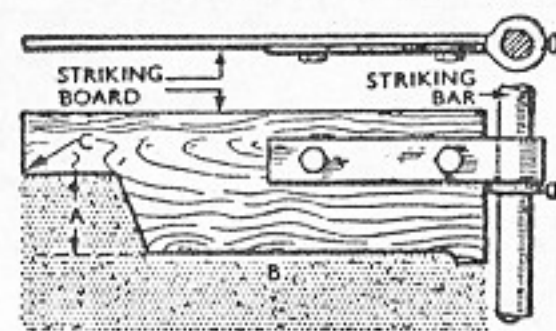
Striking-board used to prepare the bed for molding gears. A, depth of face of gear; B, bottom edge of board that strikes the bed; C, top edge of board that strikes the mold-joint.
